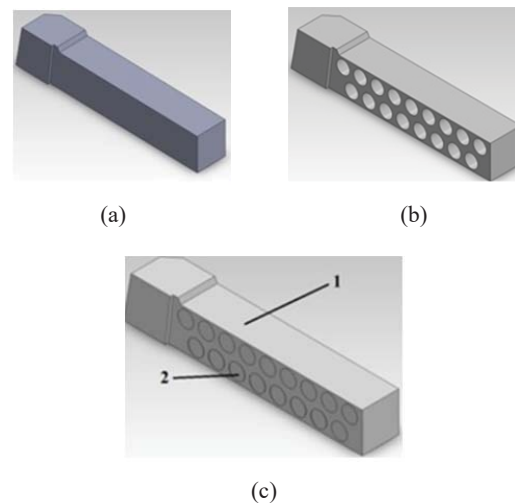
(a) Conventional cutting tool (b) cutting tool with holes in toolholder; (c) modified cutting tool filled up with epoxy granite: 1 — toolholder and 2 — epoxy granite
